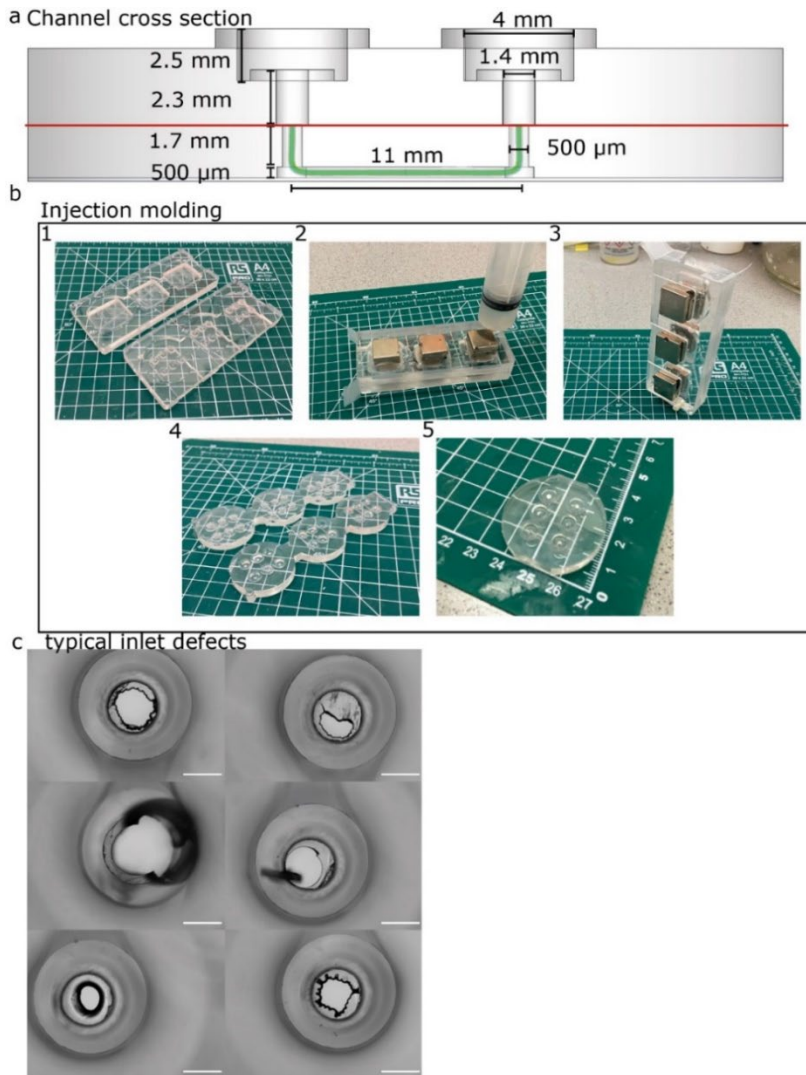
Chip design and Microfabrication using injection moulding. (a) Chip design and channel dimensions, green represents the modelled lumen, the red line indicates where the two mould halves have contact. (b) Injection moulding. Two separate mould halves show the fluidic channels and medium reservoirs (1). Injection moulds are assembled using strong magnets and PDMS is injected using a syringe (2). The injection mould is placed vertically and allowed to set at room temperature for at least 16 hours (3) followed by 1 hour at 75 °C. Magnets are removed and the PDMS is peeled off (4) excess PDMS is cut off (5) and the chip is assembled with air plasma treatment. (c) Defects at the contact points of the injection-moulds result in small membranes of various sizes.
